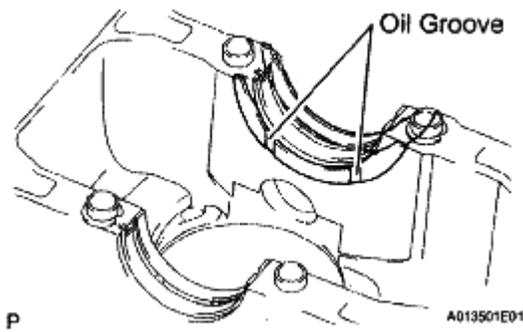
Identifying Upper Crankshaft Thrust Washer
